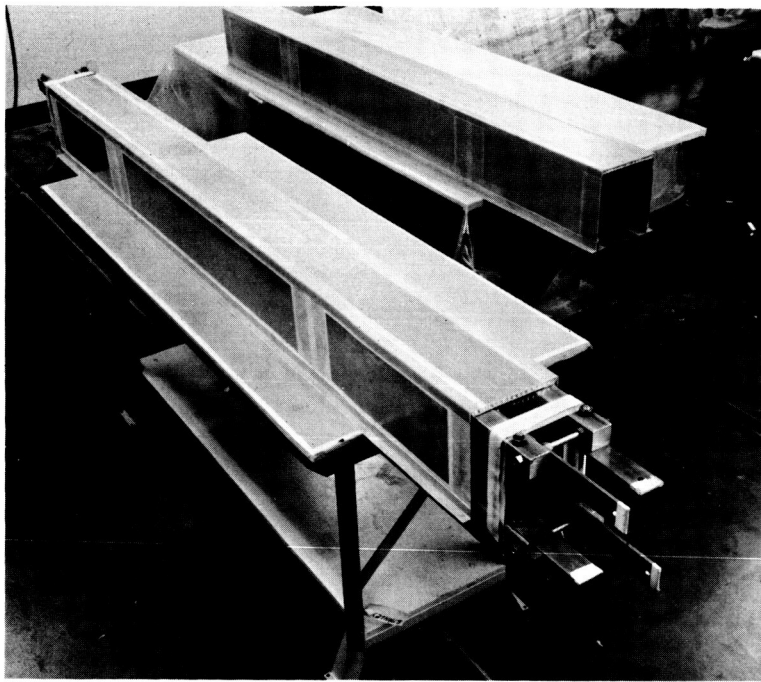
Fiberglass Reinforced Box Beam Assembly Fixture, with Beam Assembly Components in Position (A completed box beam assembly is shown in the background)
